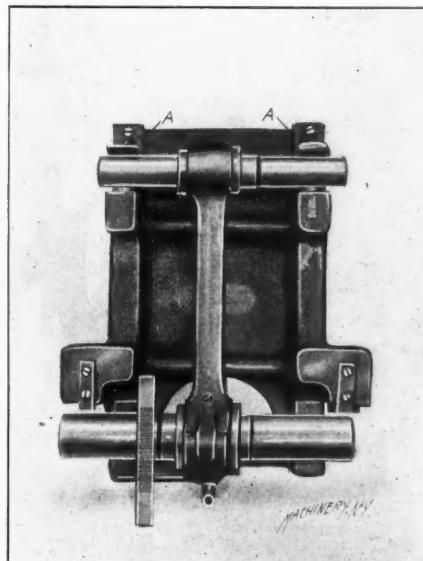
Fixture for Testing the Parallelism of Connecting-rod Bearings
